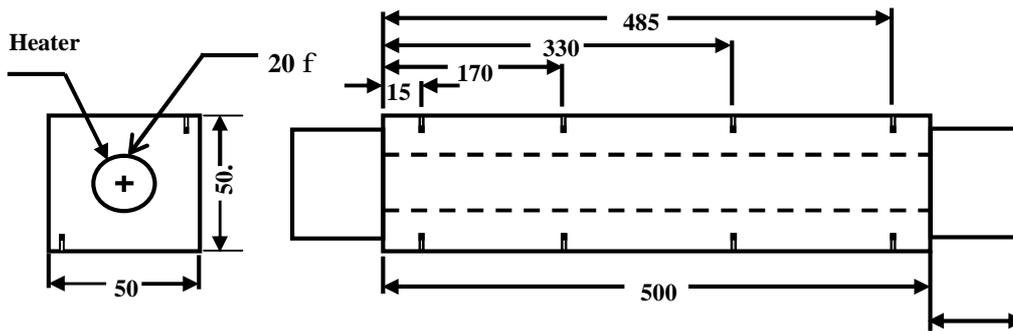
Drawing of square cross-section model showing holes for heater and thermocouple placements. (All dimensions in millimeters).
